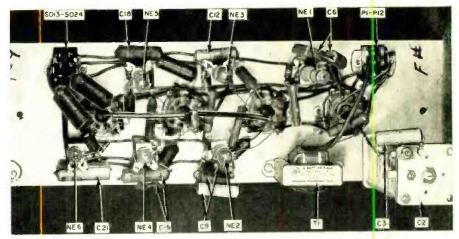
Bottom view of one of the tone generator chassis showing parts location.
